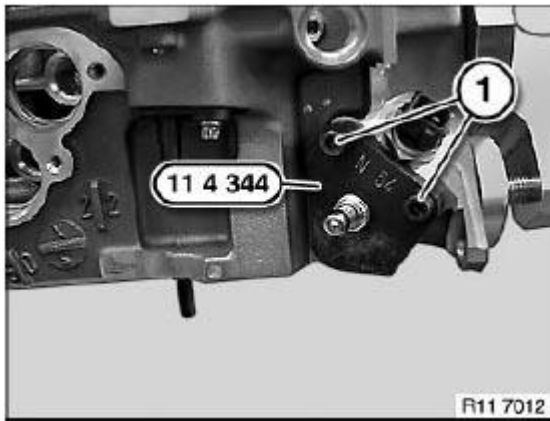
Identifying Special Tool 11 4 344 And Bolts
